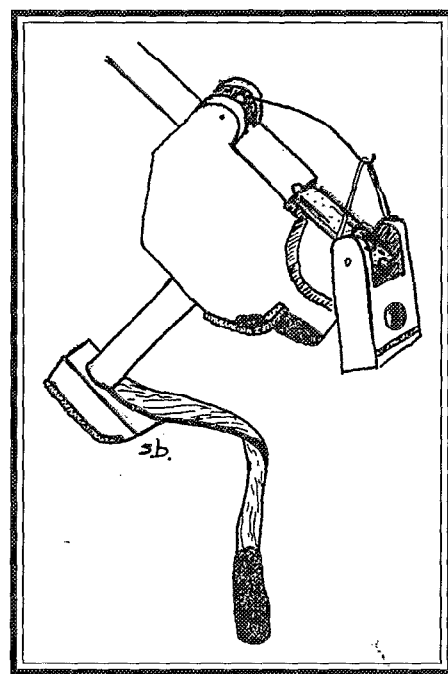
Hammer butt with Schwander-type spring and metal butt plate.
